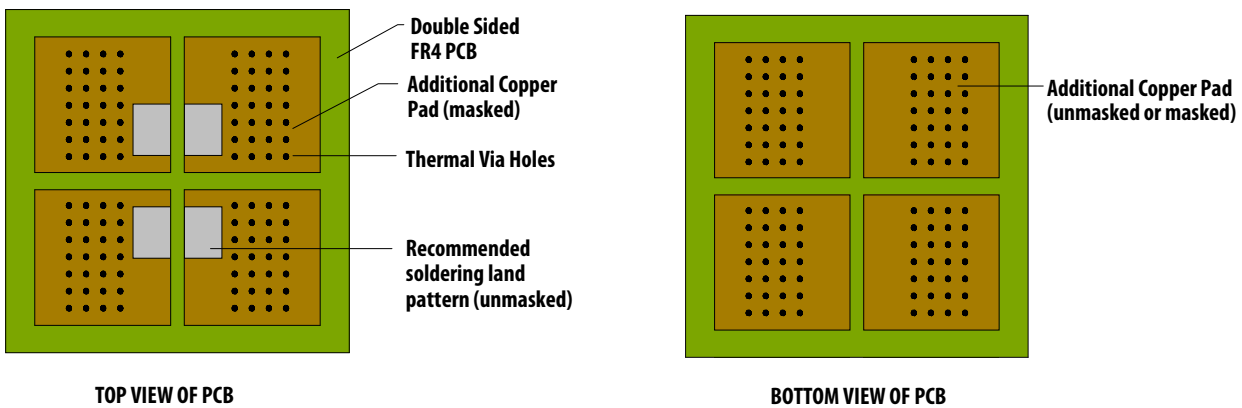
Double sided FR4 PCB with additional copper pad and thermal via.
